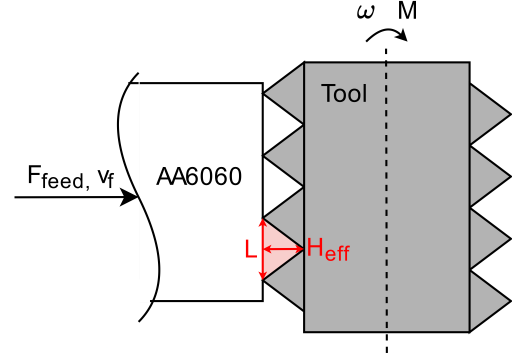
Schematic drawing of feed/tool interface with system parameters.
